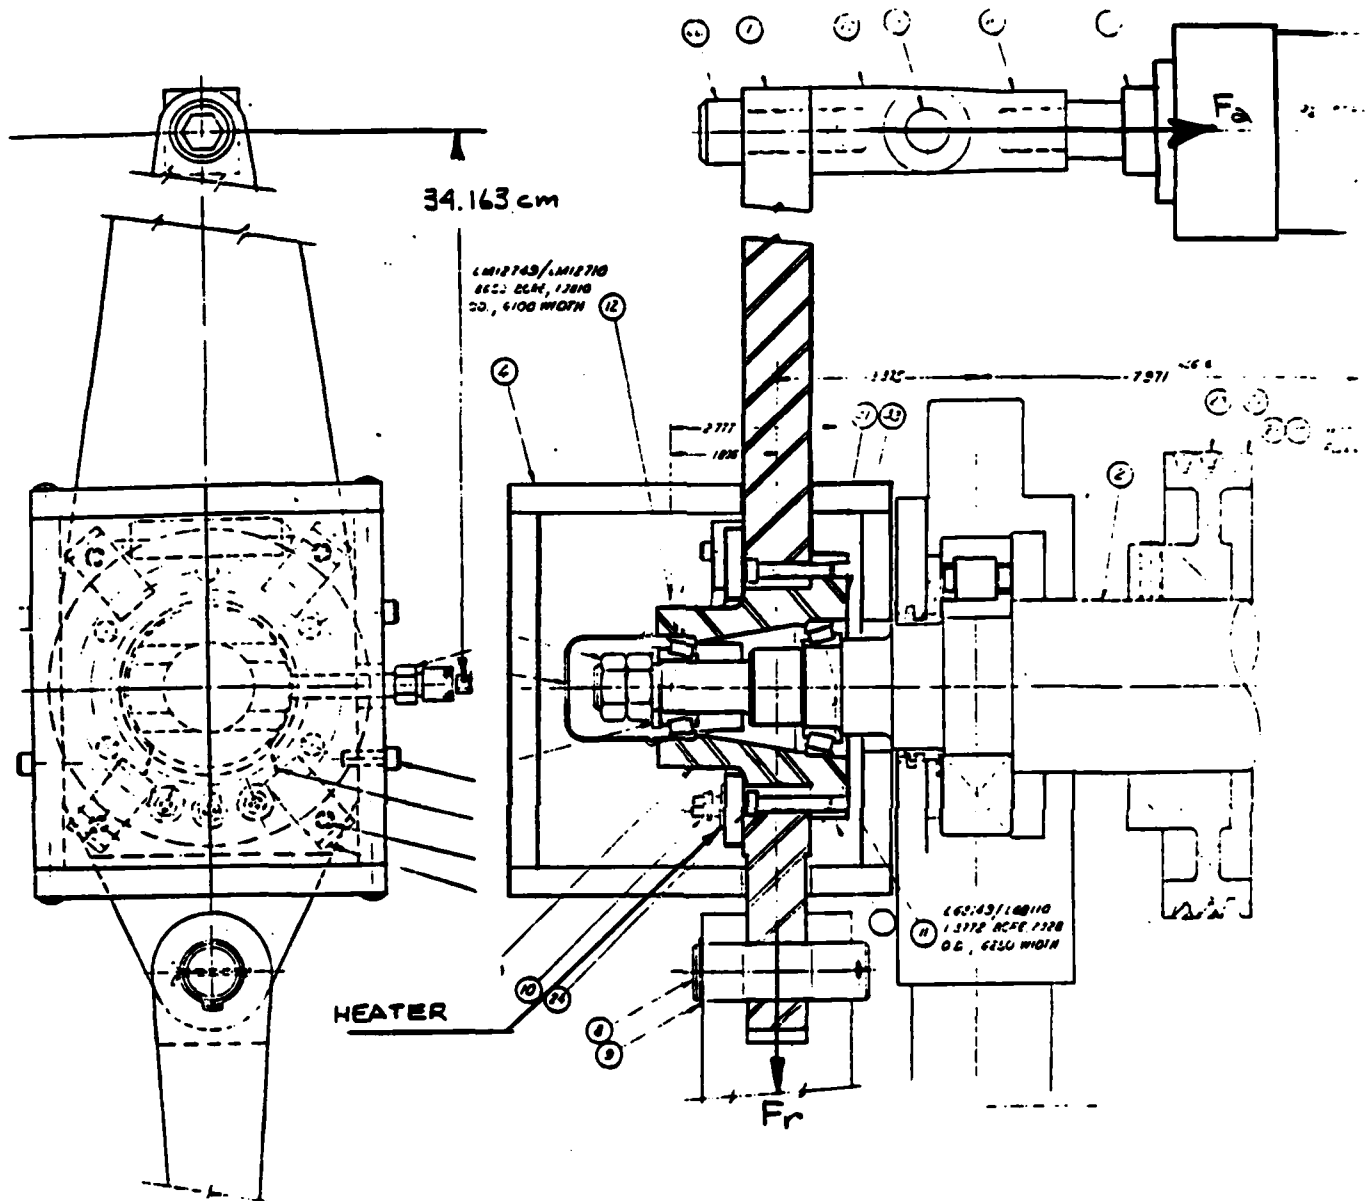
Schematic of Hub Assembly Front Wheel Bearing Grease Test Machine
